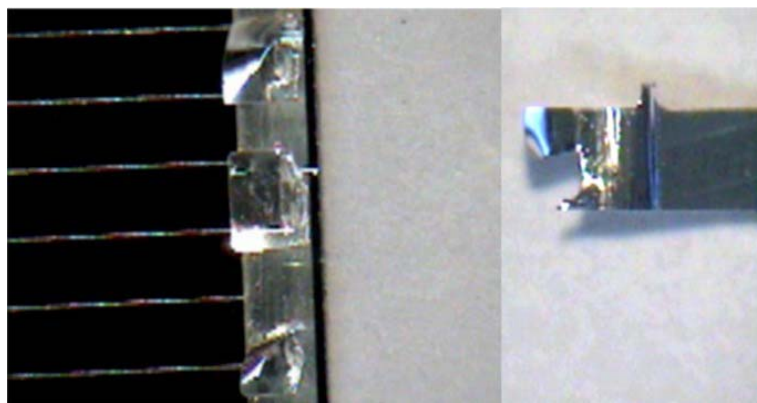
T1-S1-CP1 Test Specimen after destructive pull test. Part of the interconnectors fingers remains welded in the solar cell front contact (50x magnification).
